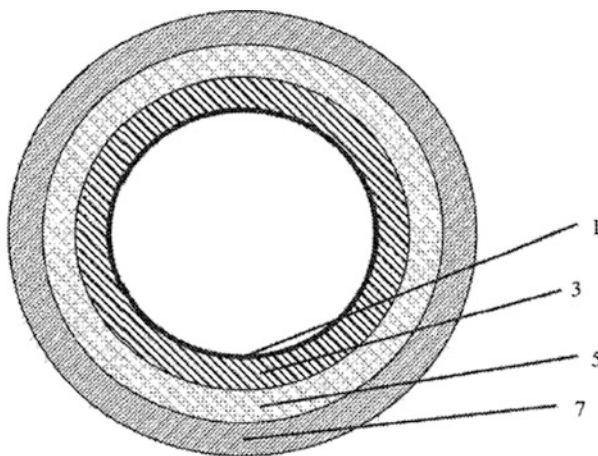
Multi-walled tubing structure for oil and gas pipelines [51]
